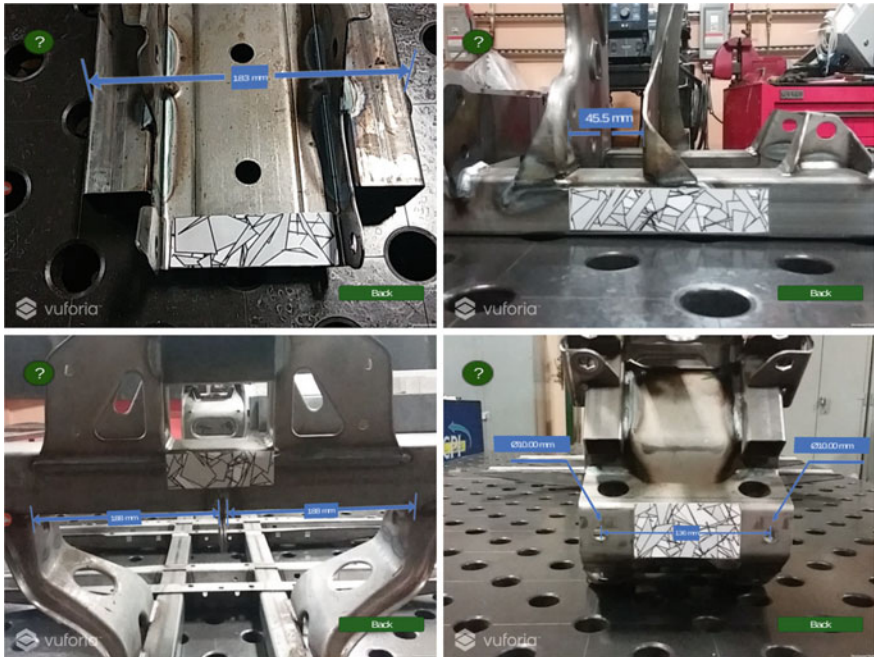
Example of the AR scenes for welding inspection
